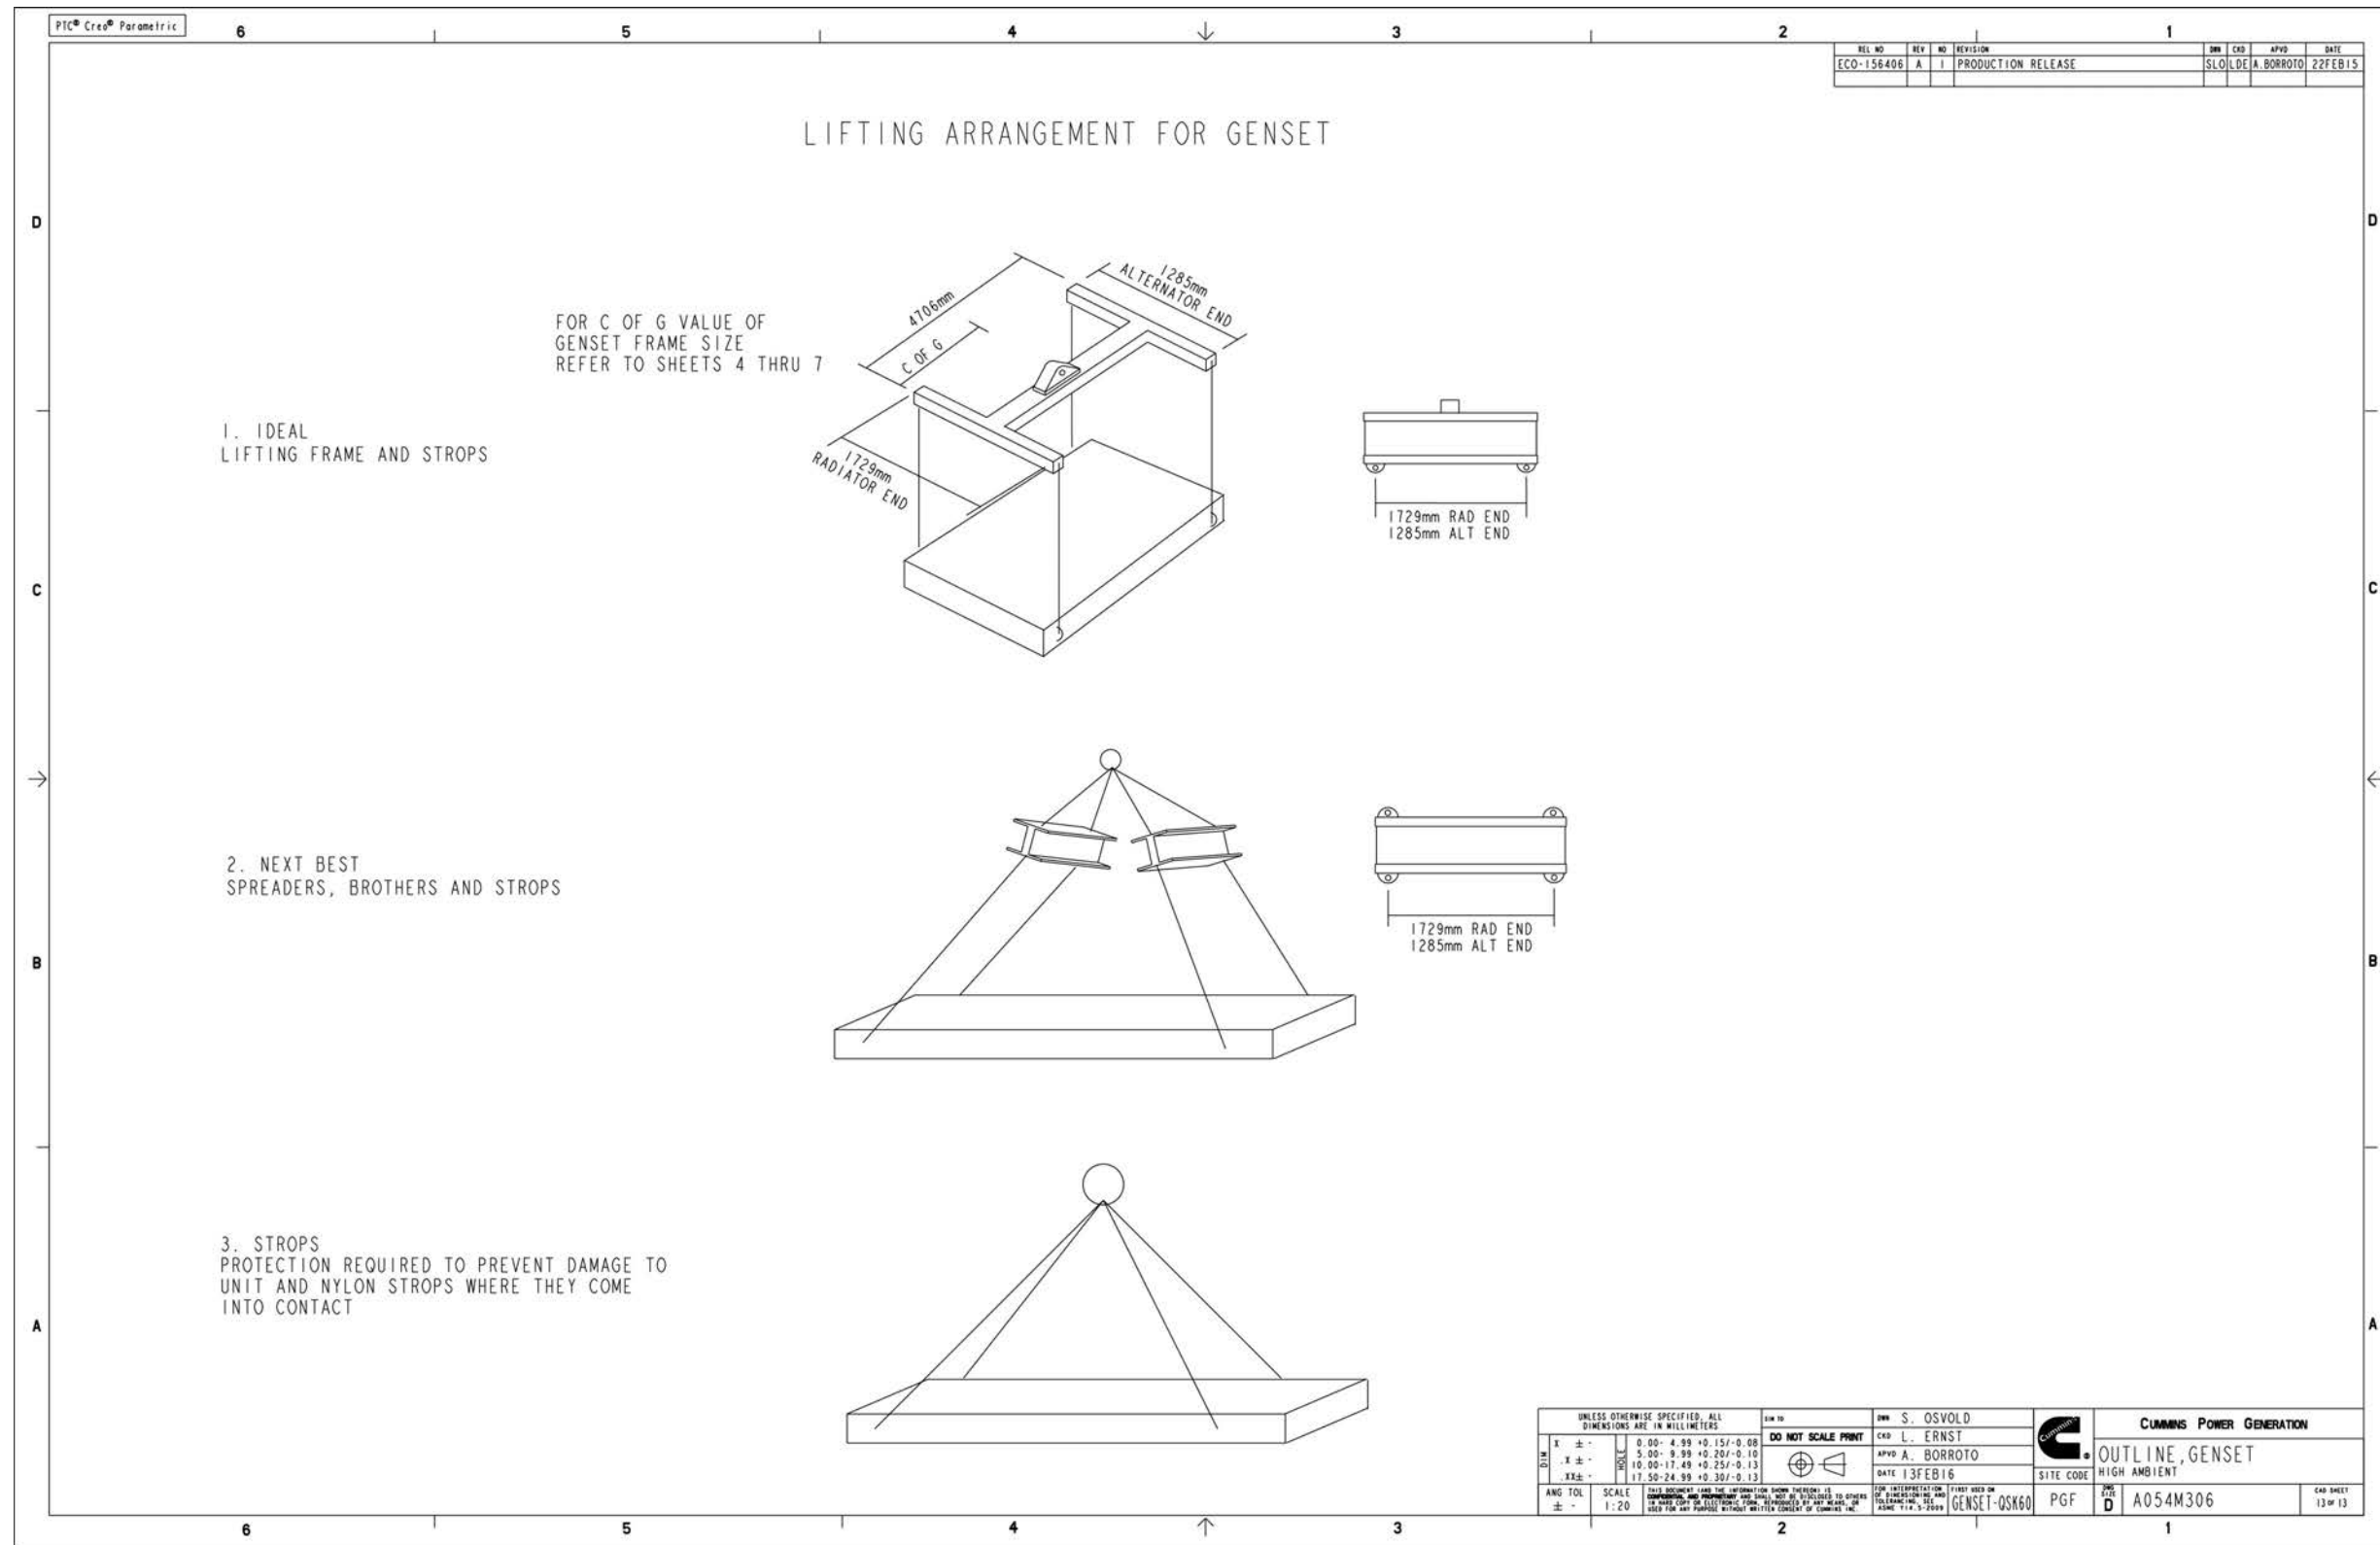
GENERATOR SET WITH HIGH AMBIENT RADIATOR OUTLINE DRAWING (SHEET 13)
